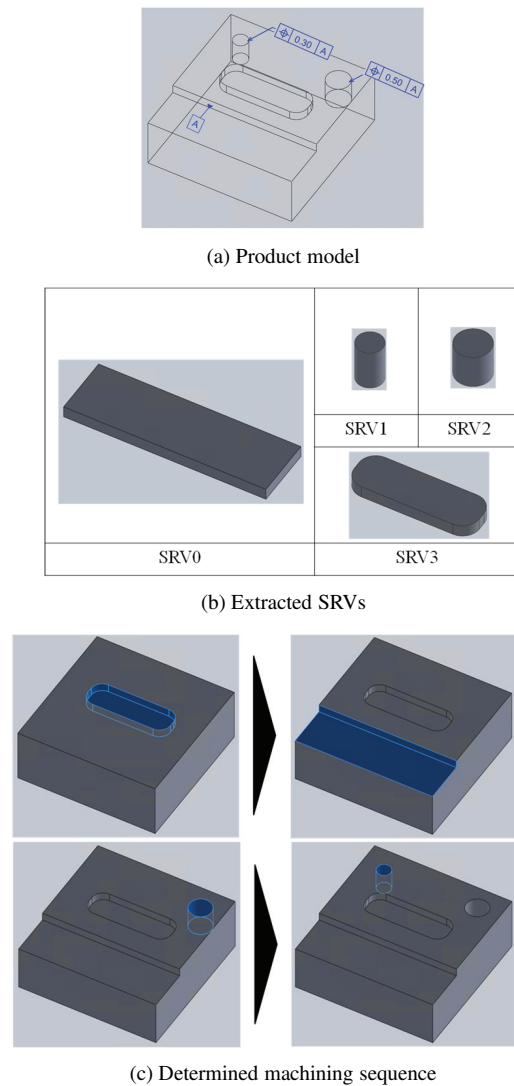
Example of the machining sequence determination constrained by GD&T.
